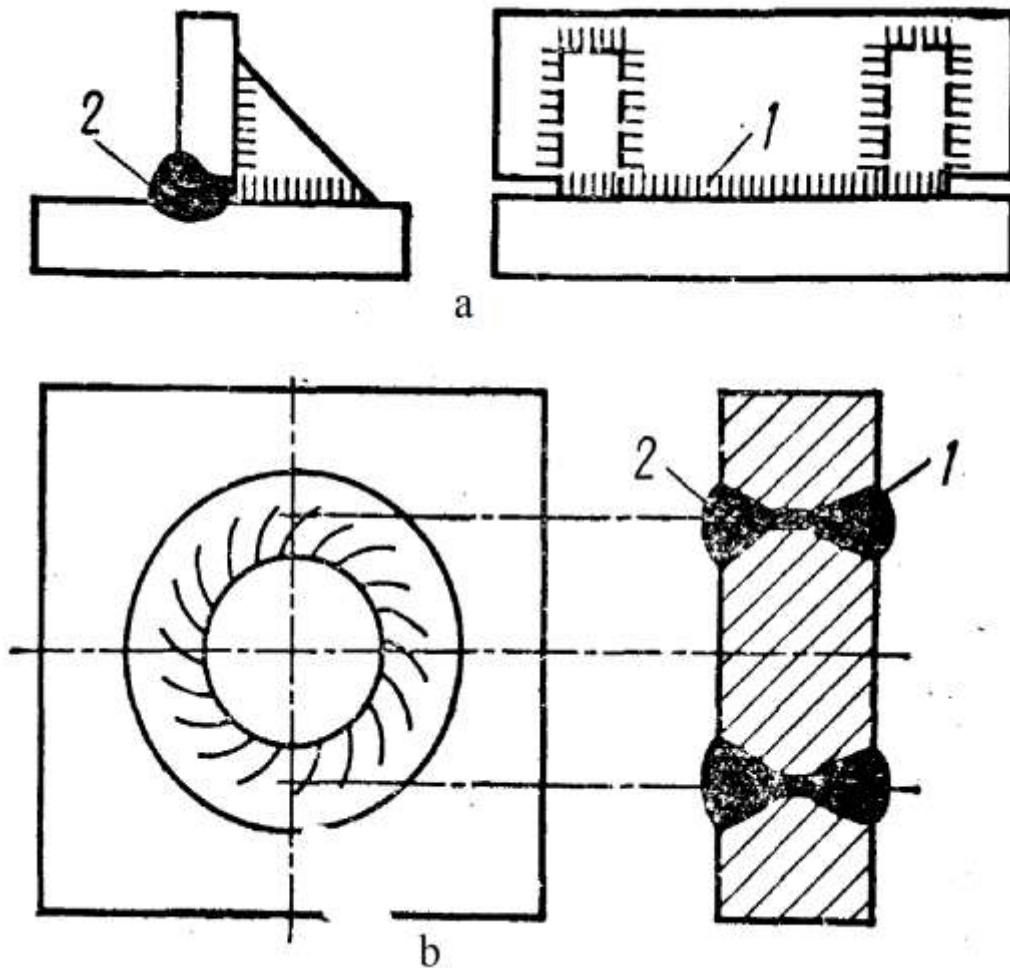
Technological tests for determining the resistance of welded joints to the formation of hot cracks:
